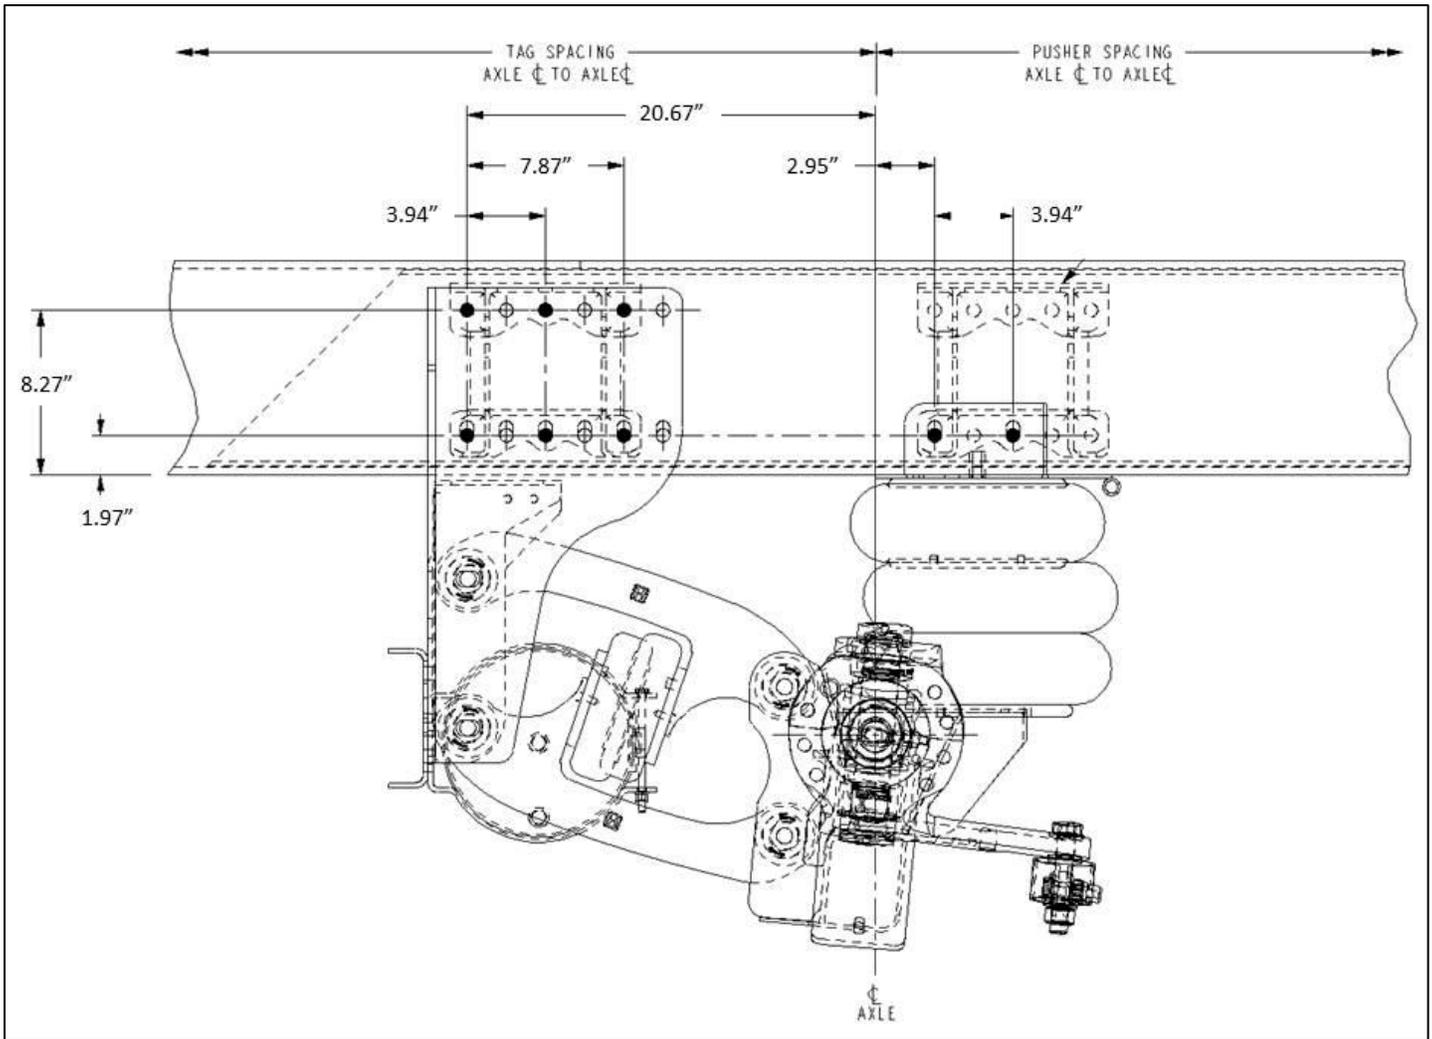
Hendrickson R Tandem Frame Drilling (Dimensions In Millimeters)
